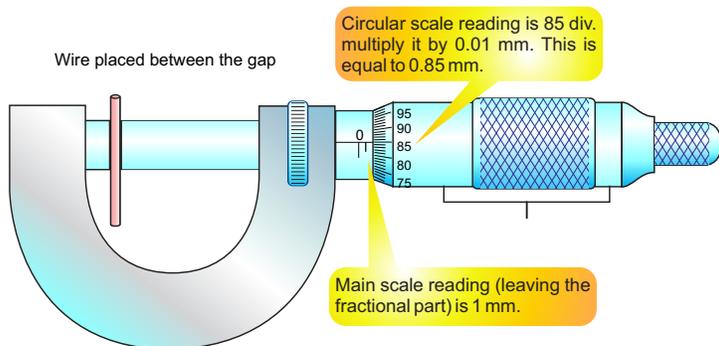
Measuring the diameter of a wire using micrometer screw gauge.
